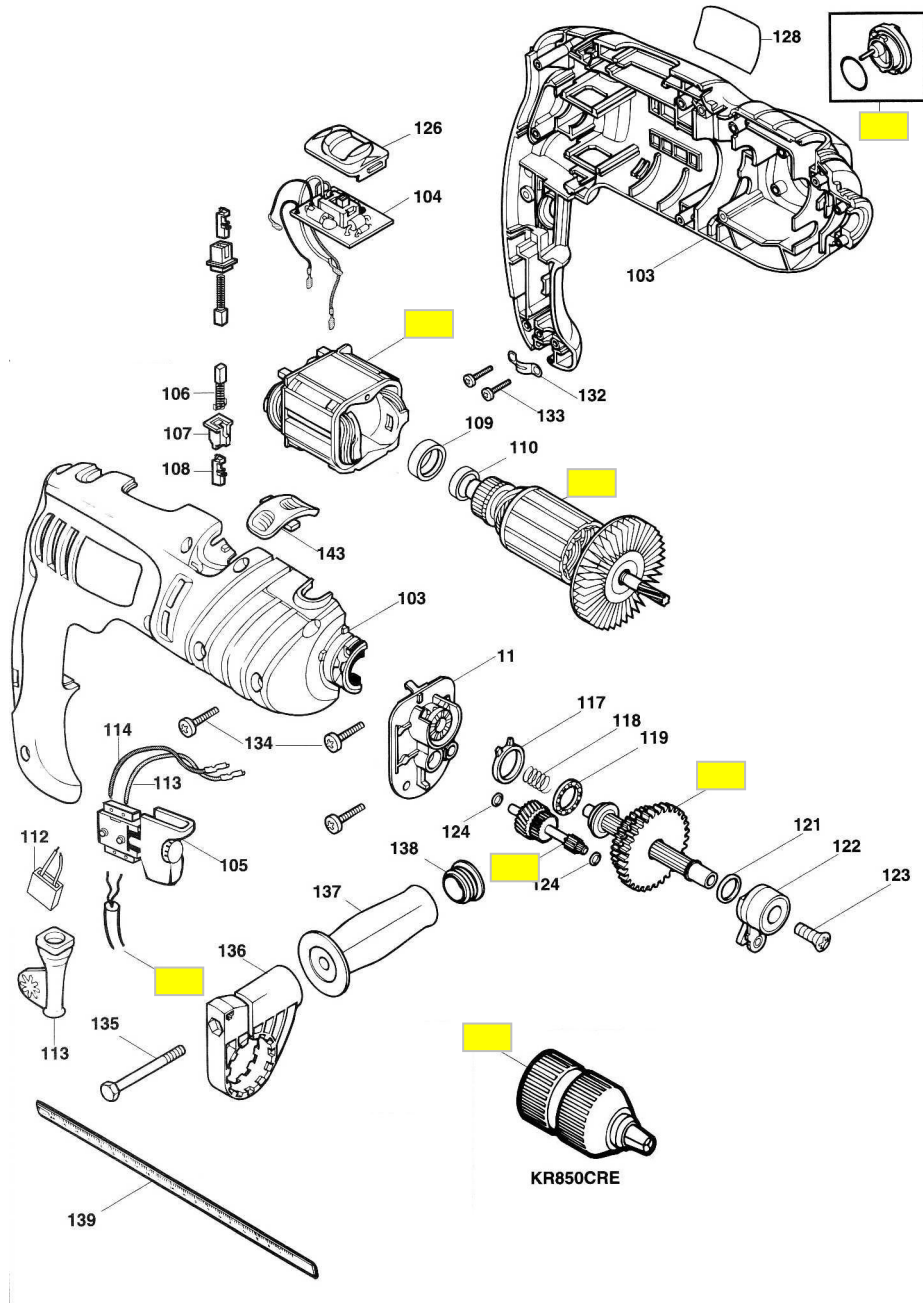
Exploded part diagram of corded drill<sup>36</sup>
